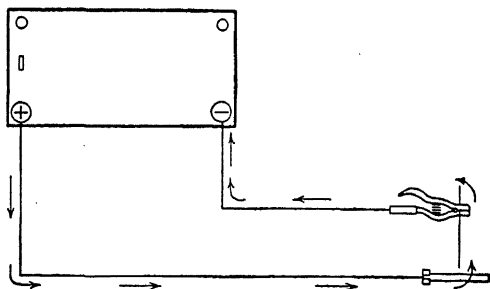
Straight polarity. Direction of flow of current when ground plate is on the positive side of the welding machine.
